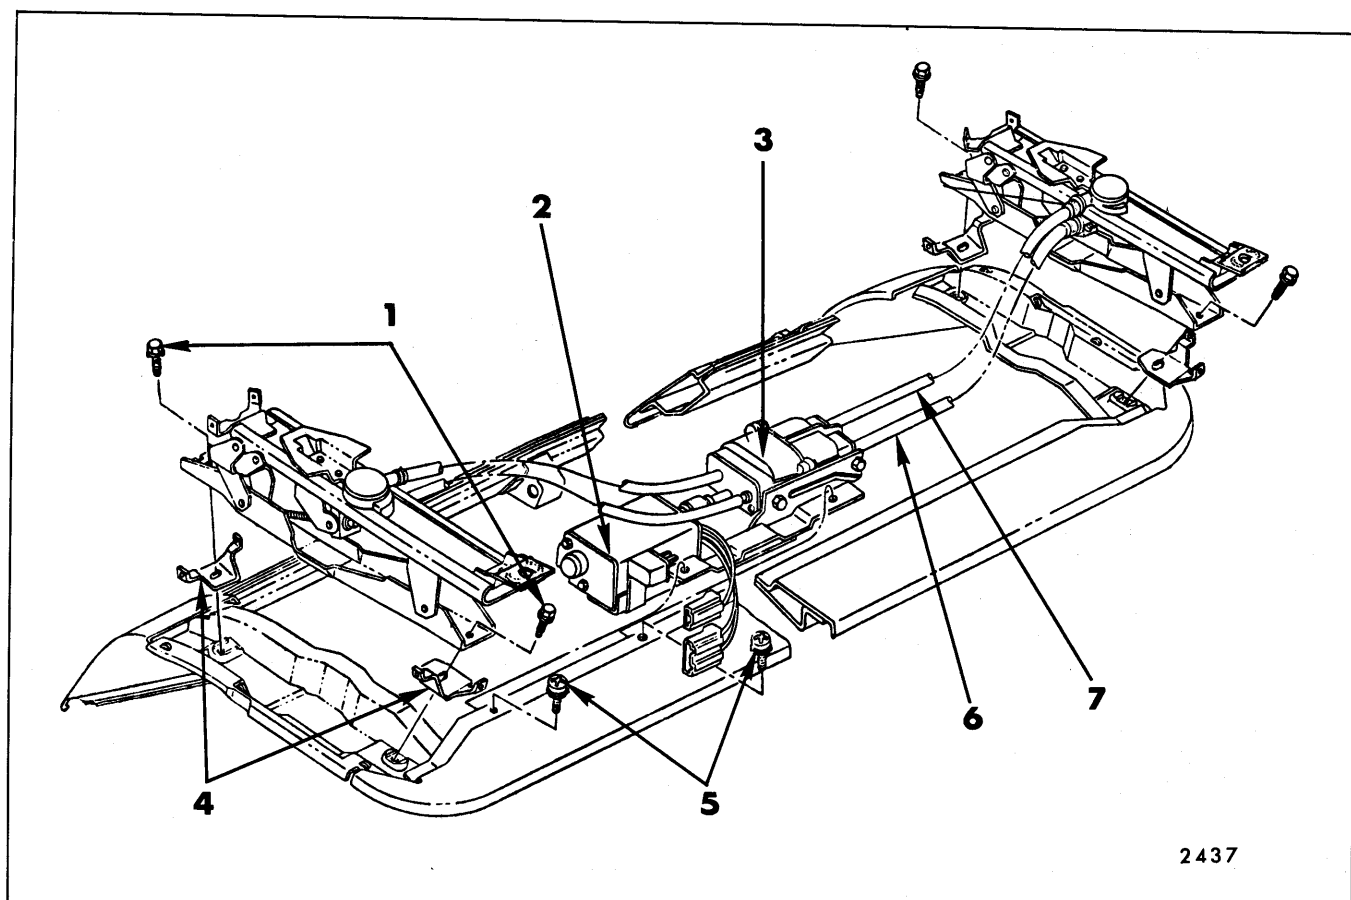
Front Seat Assembly - Four-Way Tilt - "A" Styles
